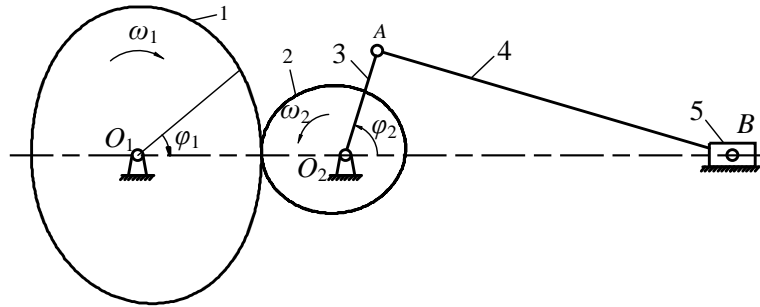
Diagram of non-circular gear-crank slider mechanism: 1. Driving gear, 2. Driven gear, 3. Crank 4. Connecting rod, 5. Slider
